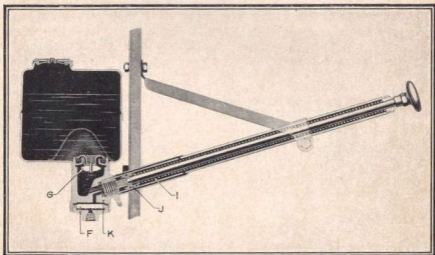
Chassis Lubrication Oil Gun and Tank
